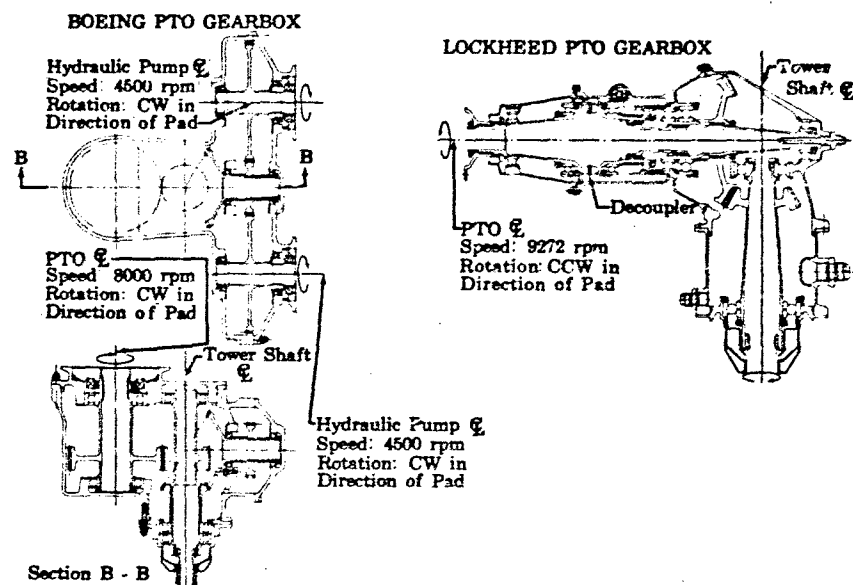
Power Takeoff Gearbox - Boeing and Lockheed
